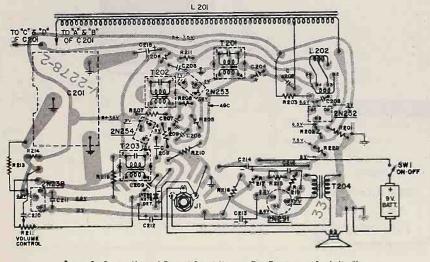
Sottom View of Printed Board Showing Top Components Symbolically
